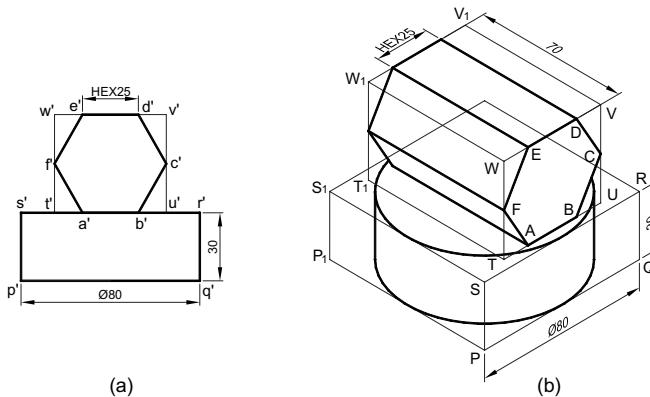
Hexagonal prism placed over a cylindrical block (a) Front view on a scale factor of 0.816 (b) Isometric projection
